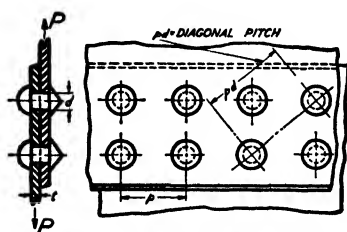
Double-Riveted Lap Joint, Chain Riveting
